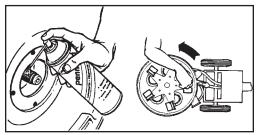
Lubricate Shaft and Re-install Head Assembly
